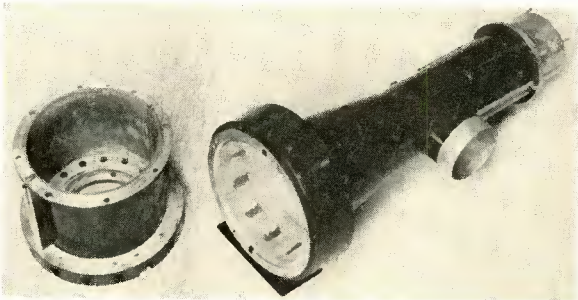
External conductor of the plate cavity. The cylindrical and tapered parts are disassembled.
